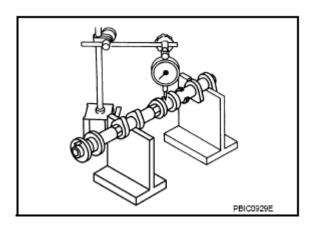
Checking Camshaft (EXH) Runout Using Dial Indicator
